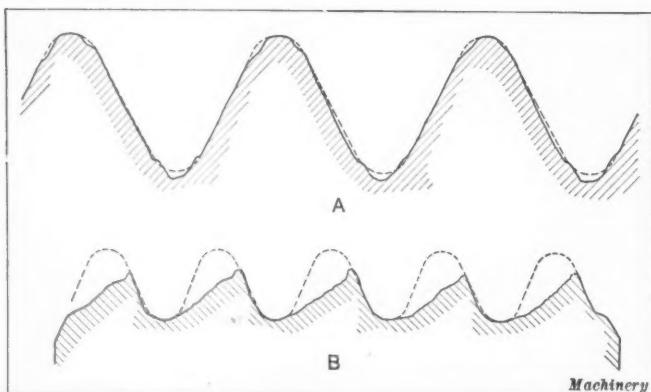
(A) Tracing of Thread on Airplane Motor Bolt. (B) Thread supposed to conform to British Association Standard
